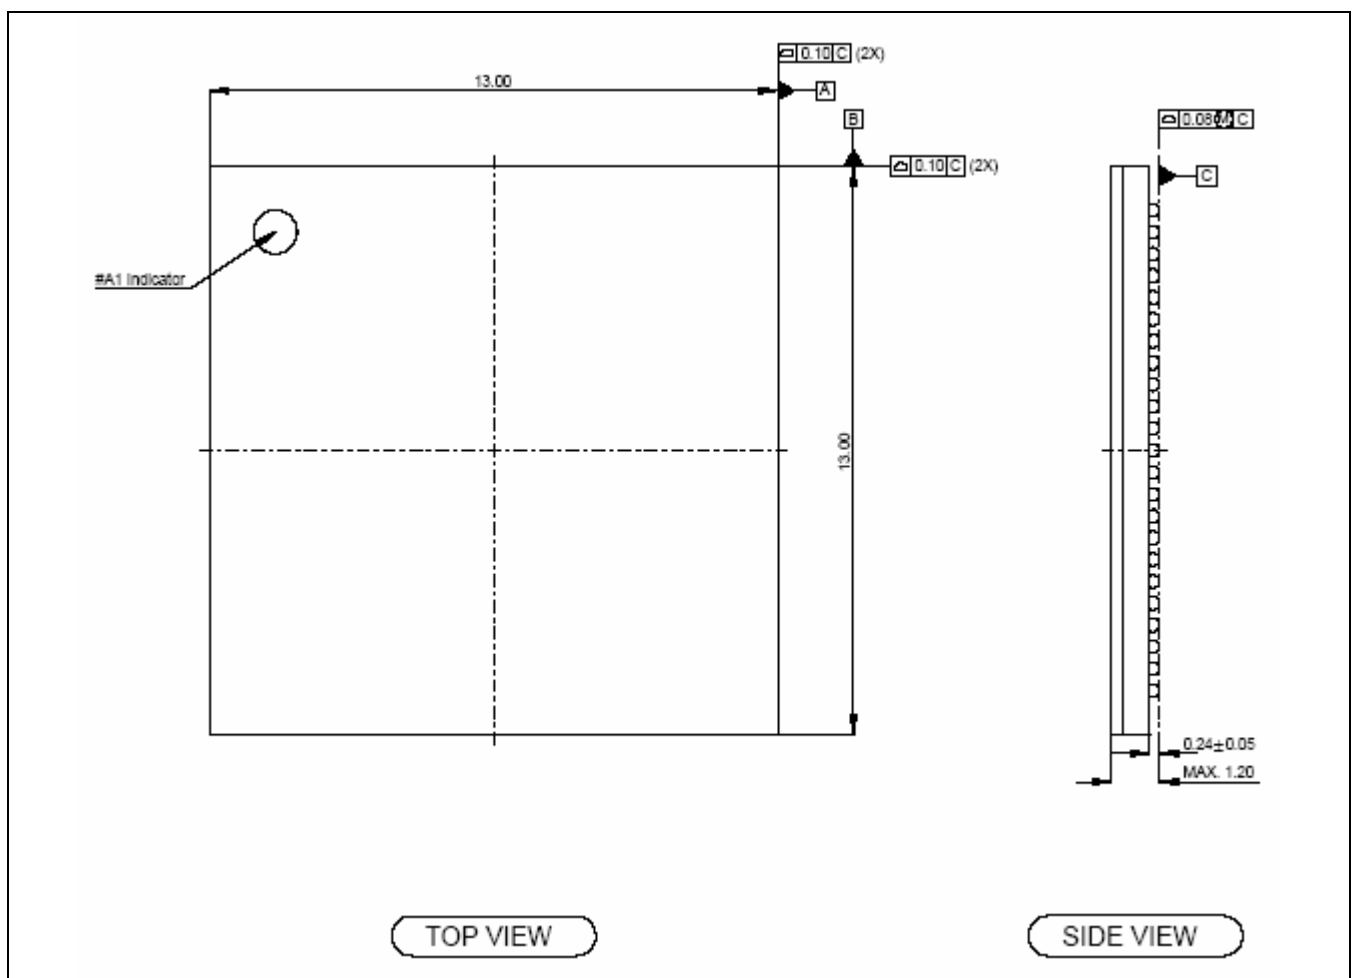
400-FBGA-1313 Package Dimension 1 (Top View)
